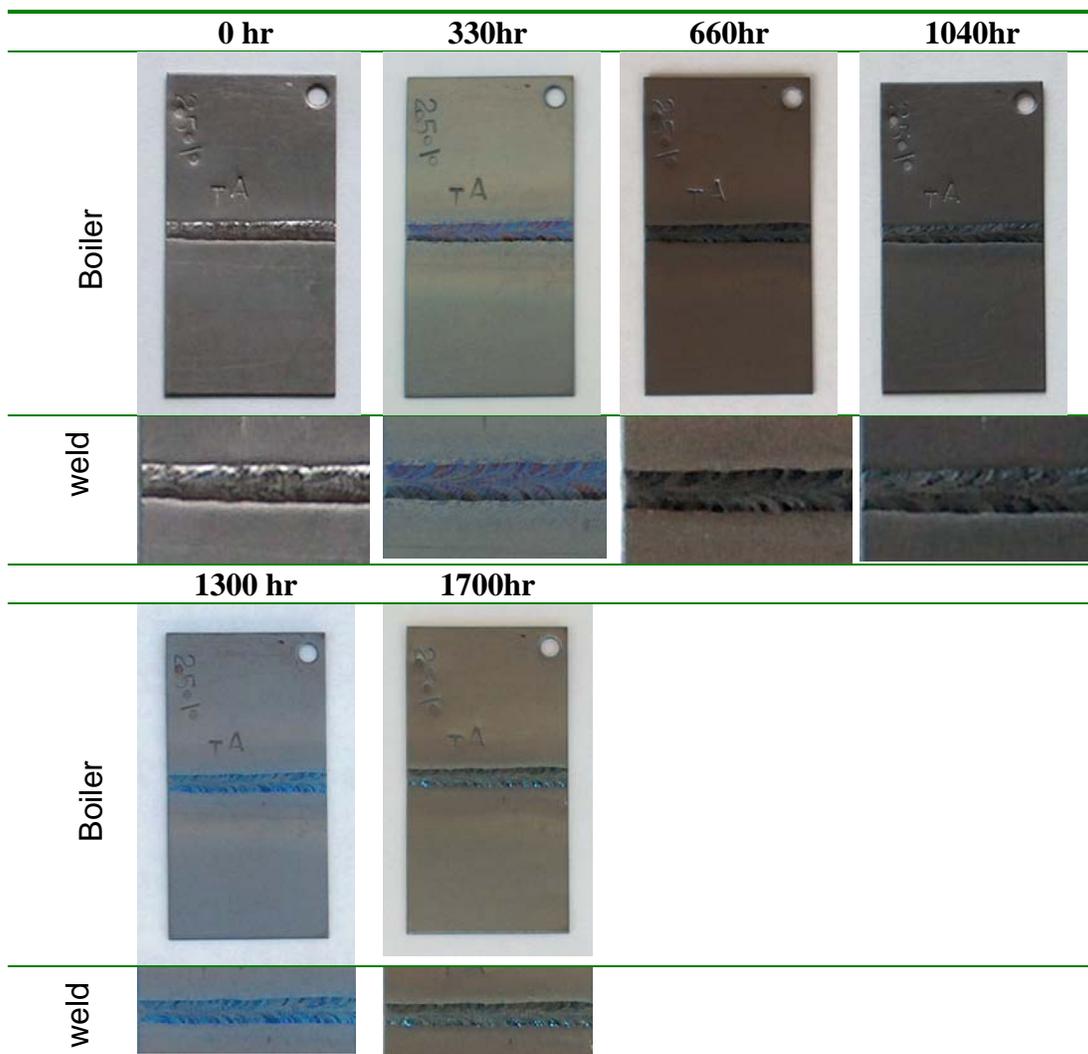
Ta-10W immersion corrosion coupon with an e-beam weld.
